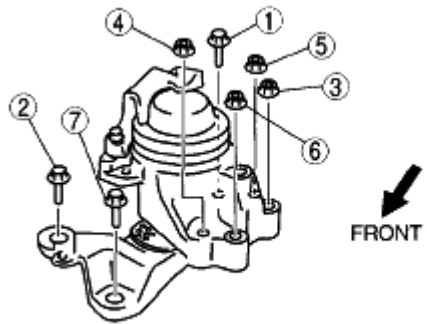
Identifying Engine Mount No. 3 Bracket Bolt And Nut Tightening Sequence
